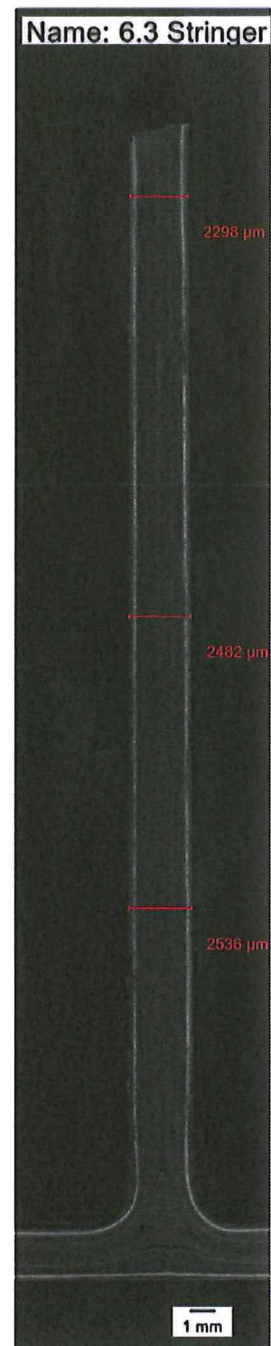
Cross section of panel 7 stringer 3b skin
